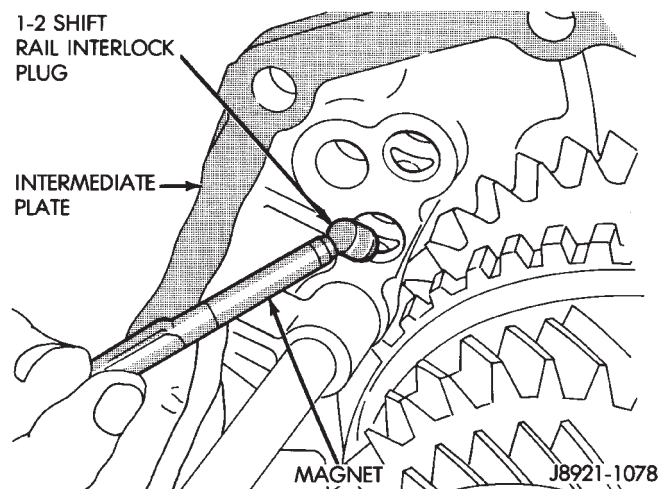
Removing 1-2 Shift Rail Interlock Plug
